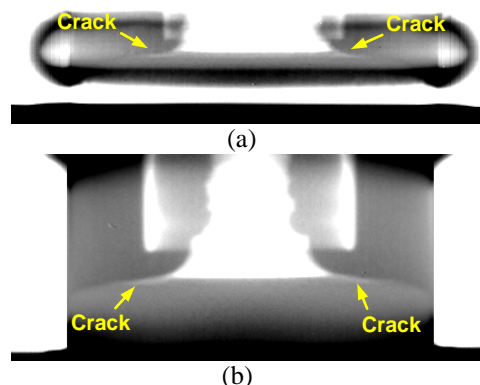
Digital radiographs of a (a) cut and (b) complete friction-welded joint samples.
